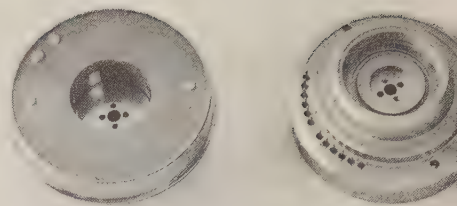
The microsyn assembly is potted in an epoxy resin. At the left is a view of the front end of the microsyn assembly. This is the end which faces toward the spherical float assembly (Fig. 1). At the right is shown the back of the assembly. Also encapsulated in the beryllium housing of the assembly are electrical contact pins, a magnetic shield, and a printed circuit board.
